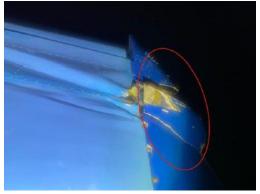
Left wing tip fairing (PN: C6W1004-1) damaged
